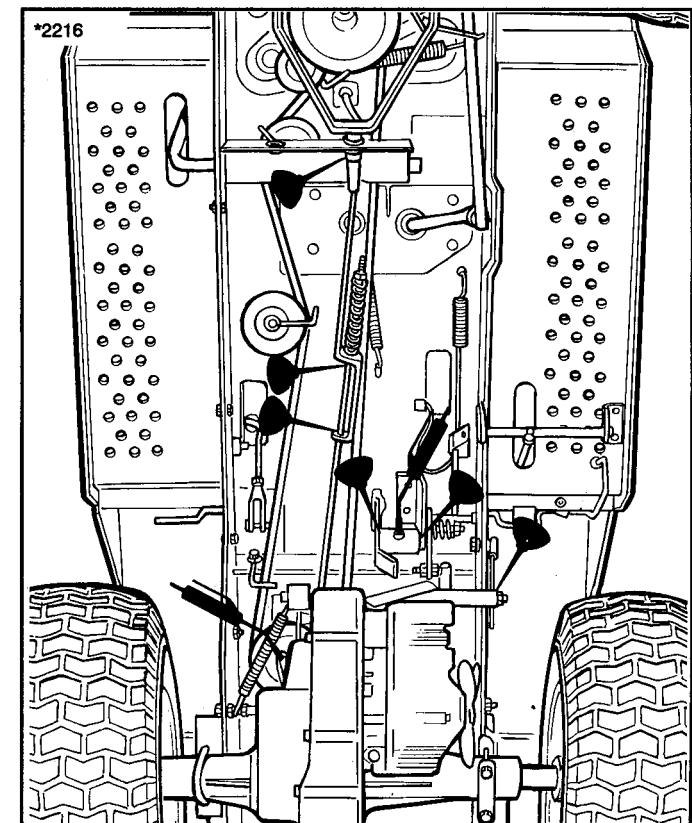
Clutch & Brake Rod Lubrication (Hydro Model)
